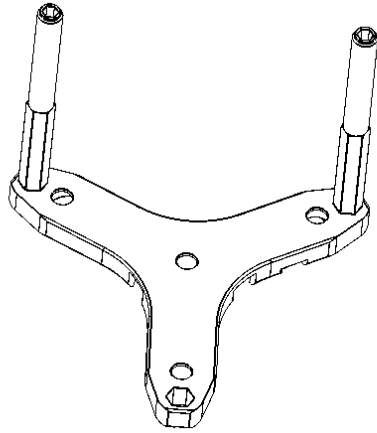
Drawing of the detector mounting plate and hollow hexagonal rods. The front rod is removed to show the hexagonal hole in the mounting plate.
